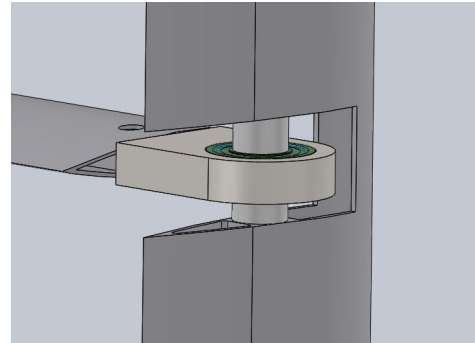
Blade to top strut connection, using freely rotating bearing
